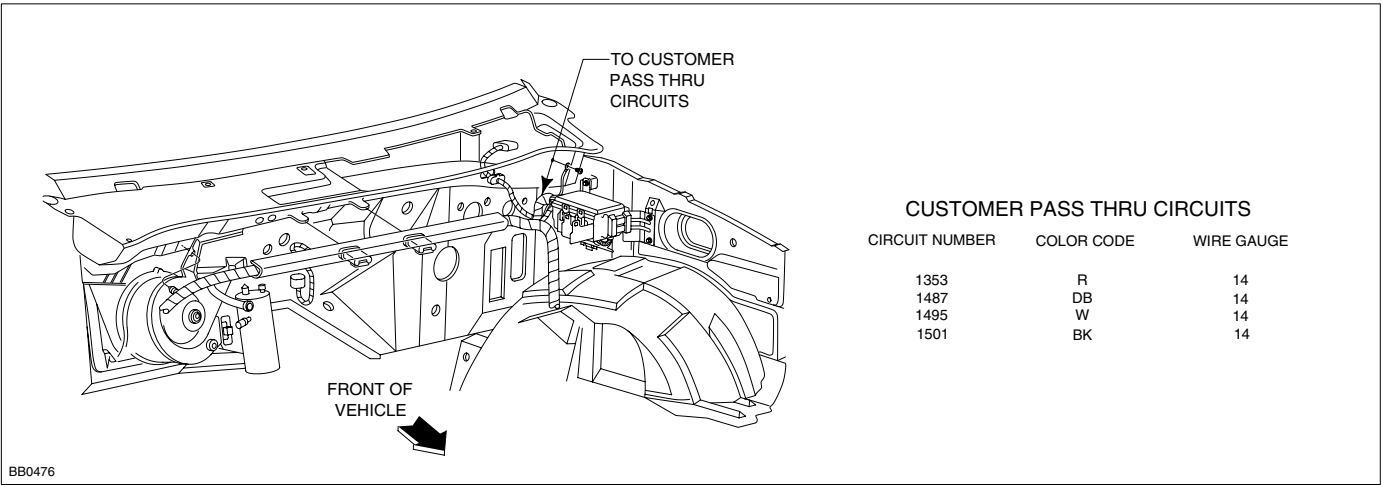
FIGURE B VIEW UNDER HOOD SUPER DUTY F-SERIES
